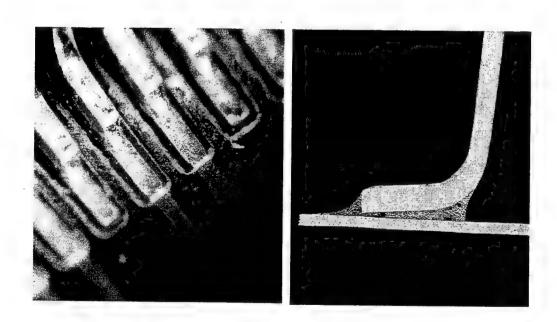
typical solder joint and cross section, from a successfully salvaged, pre-tinned, solderable gull-wing lead toe-end.
